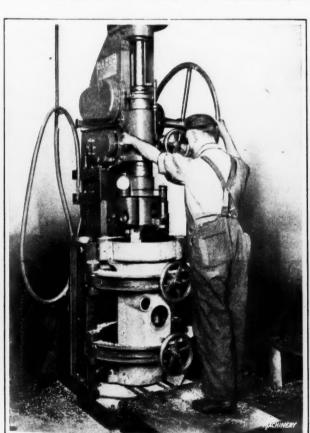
Operation in which the Bell-housing End of the Crankcase is rough- and finish-bored, faced, and chamfered
